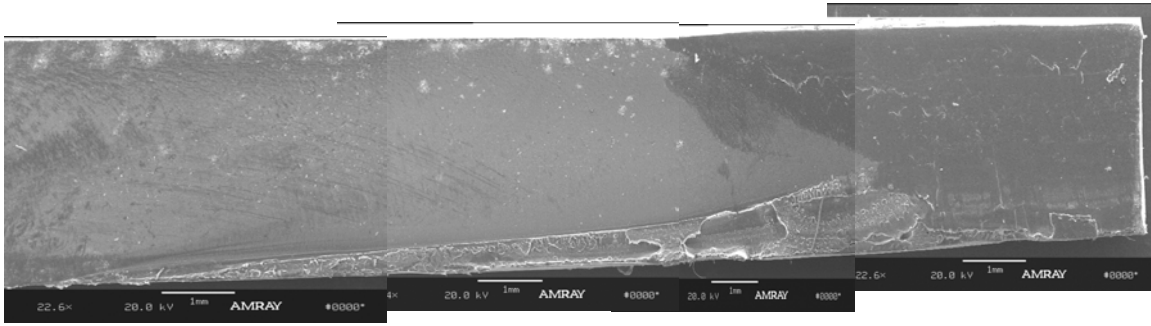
General view of the fracture surface of Specimen 3 from Sample 131-SB-SE-6
